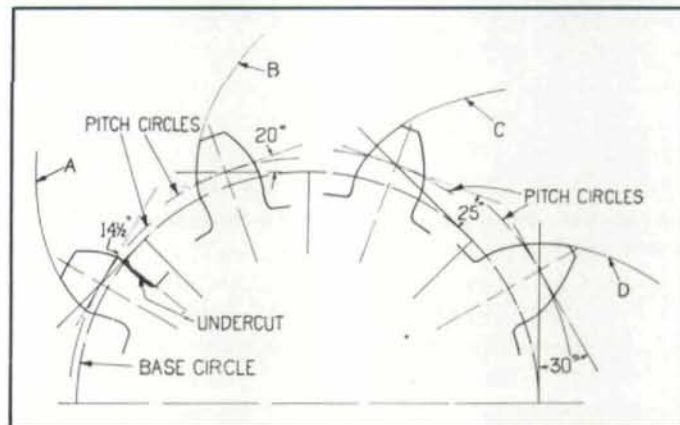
Diagram illustrating that pressure angle is governed by portion of involute used for gear tooth.
